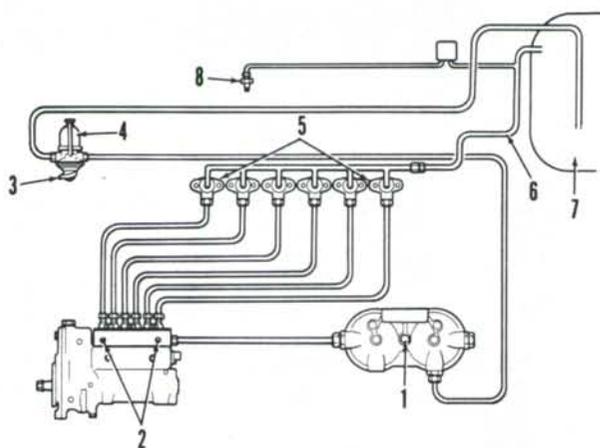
View showing typical fuel system for six-cylinder engine. Refer to Fig. 105 legend except for thermostart unit (8).
